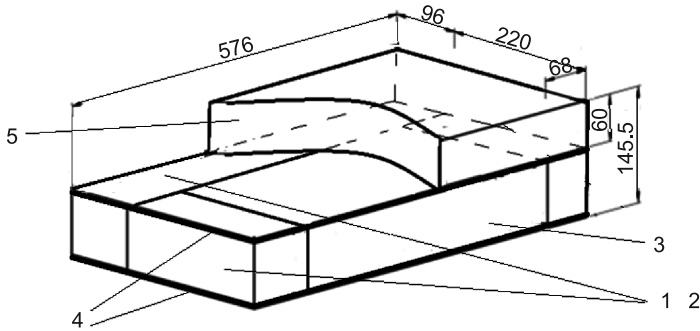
Cross-section of the foam seat (seat A). Seat components: 1, 2 – frames, 3 – foam filling, 4 – upper and bottom layers of felt, 5 – seat upholstery (dimensions [mm])
